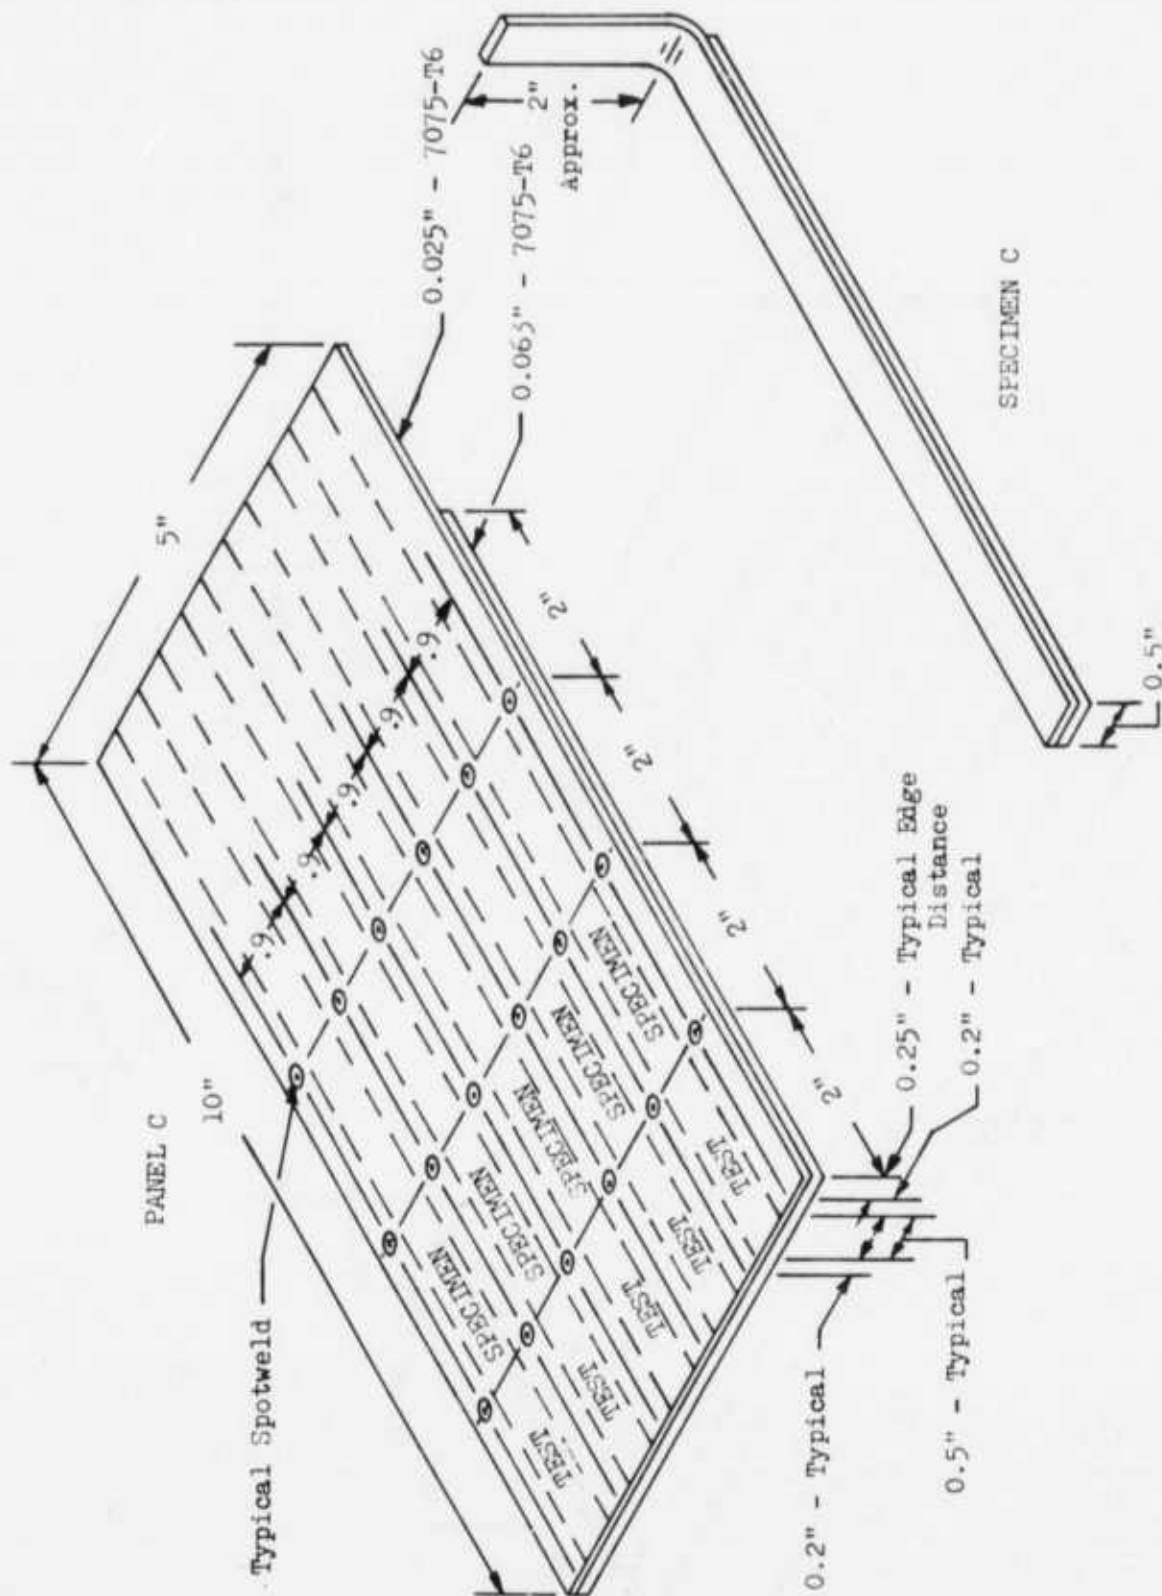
"BELL" PEEL TEST PANEL AND TEST SPECIMEN FOR SPOTWELD -
